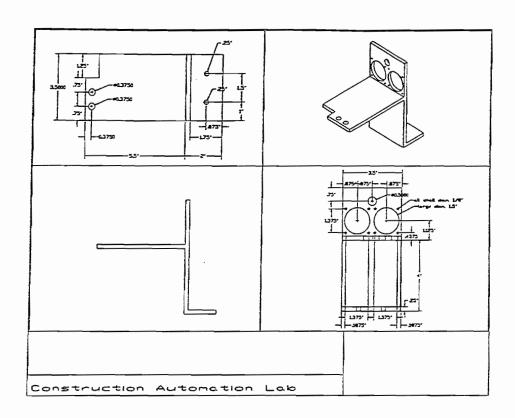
Cable Hard Connect Drawing - Manufactured by the Automated Construction Laboratory
